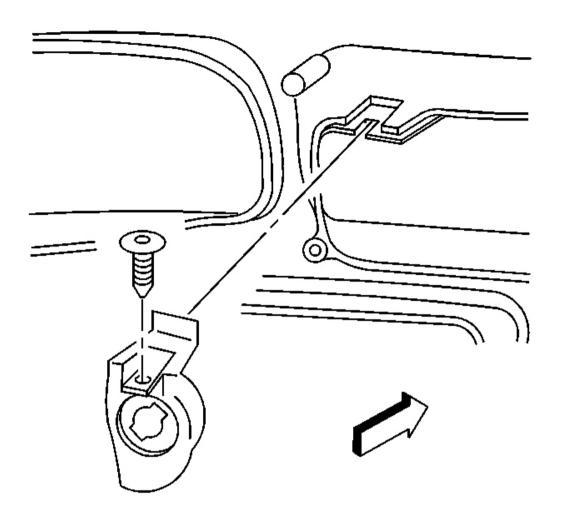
Front Position Lamp Assembly Courtesy of GENERAL MOTORS CORP.
